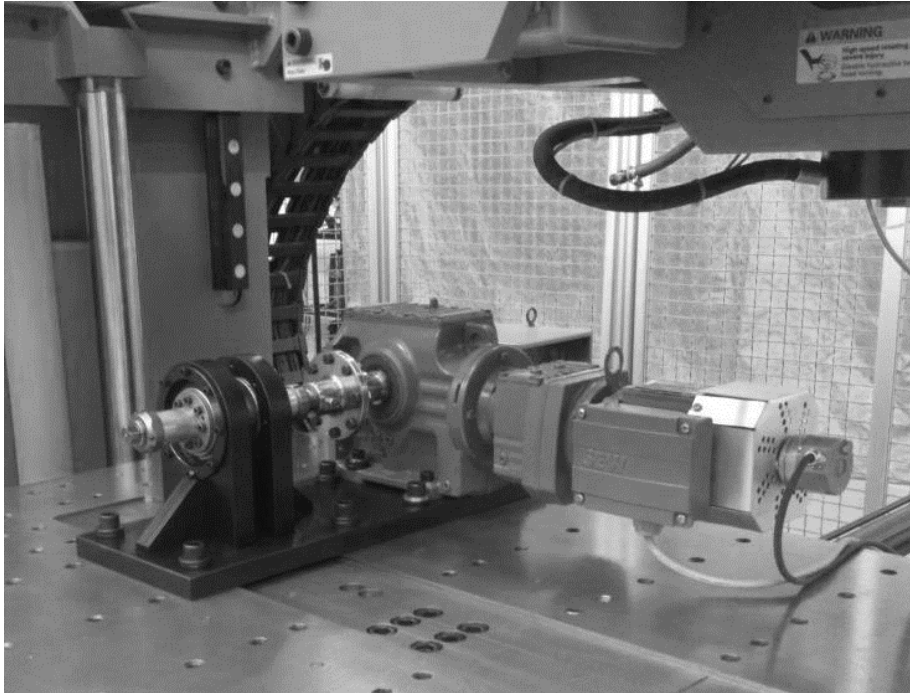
Illustration of a tube specimen in position ready to be welded.
